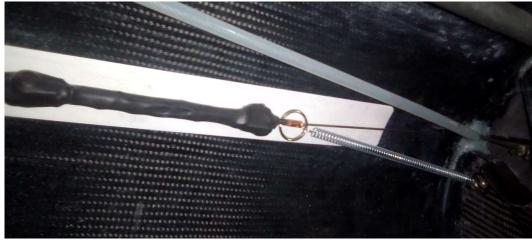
Spring assembly fastening onto tailwheel cable between bulkhead B8 and bulkhead B9
